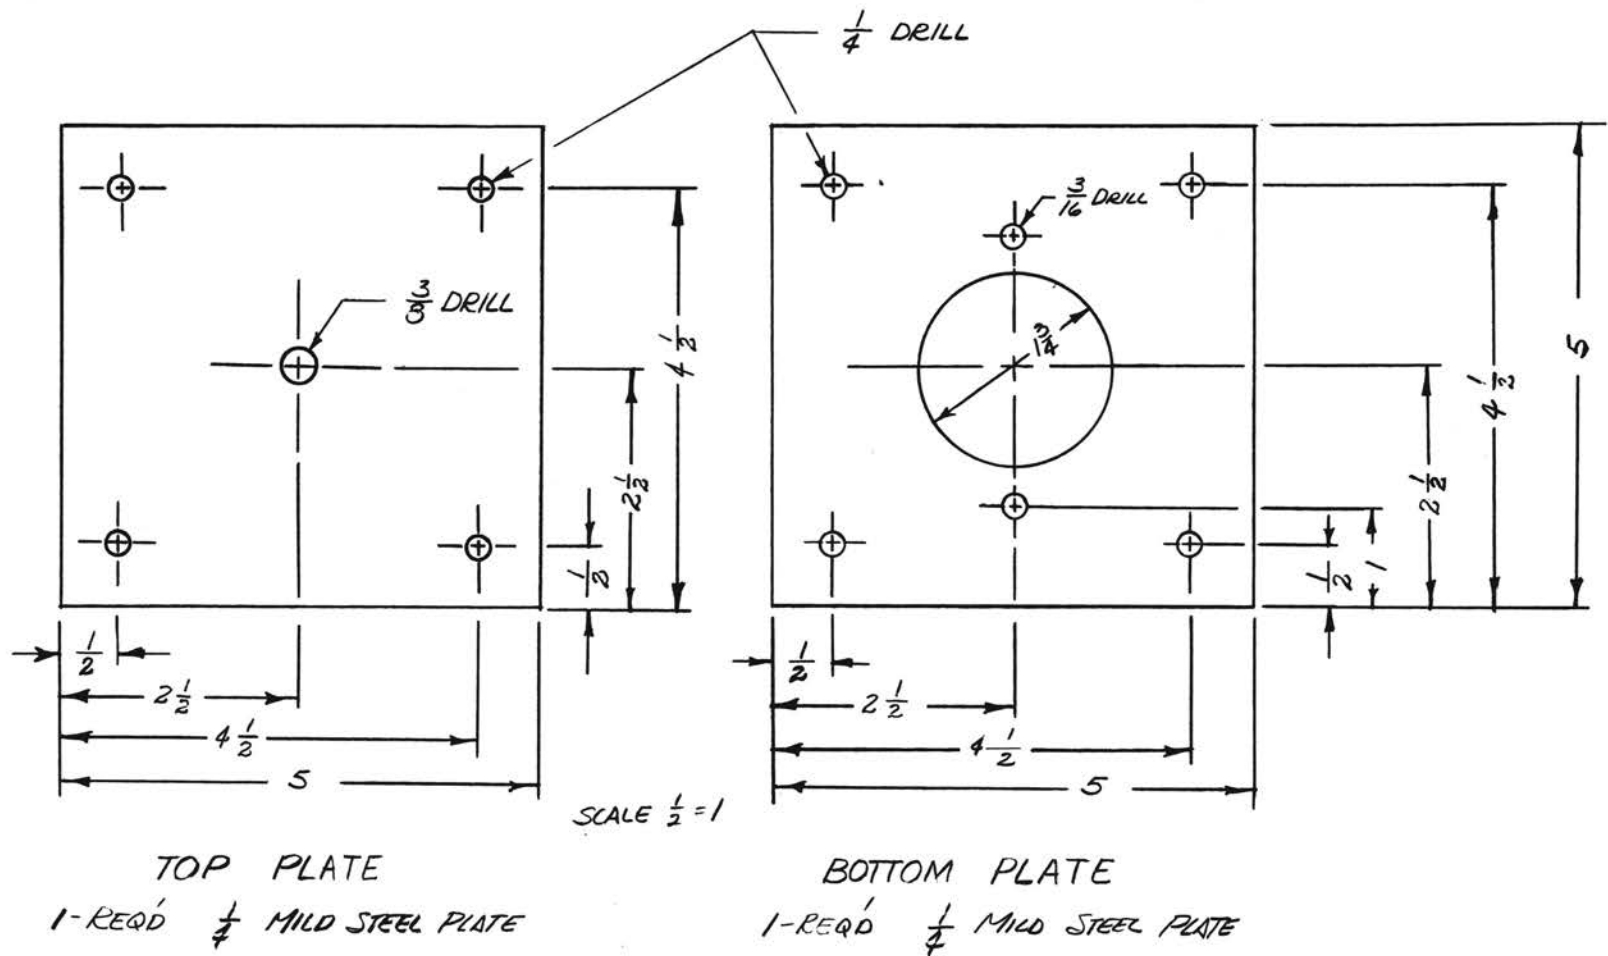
Details of Loading Frame Components, Sheet 2 of 3
